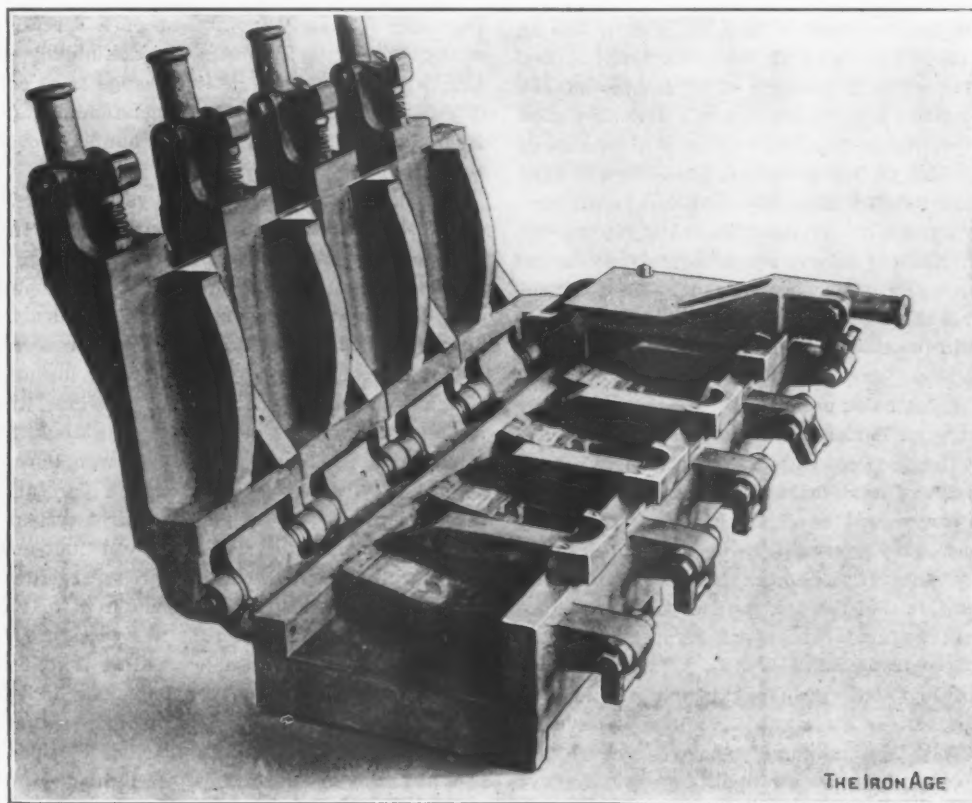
Iron Molds for M. C. B. Brake Shoes.—One Mold Closed.
